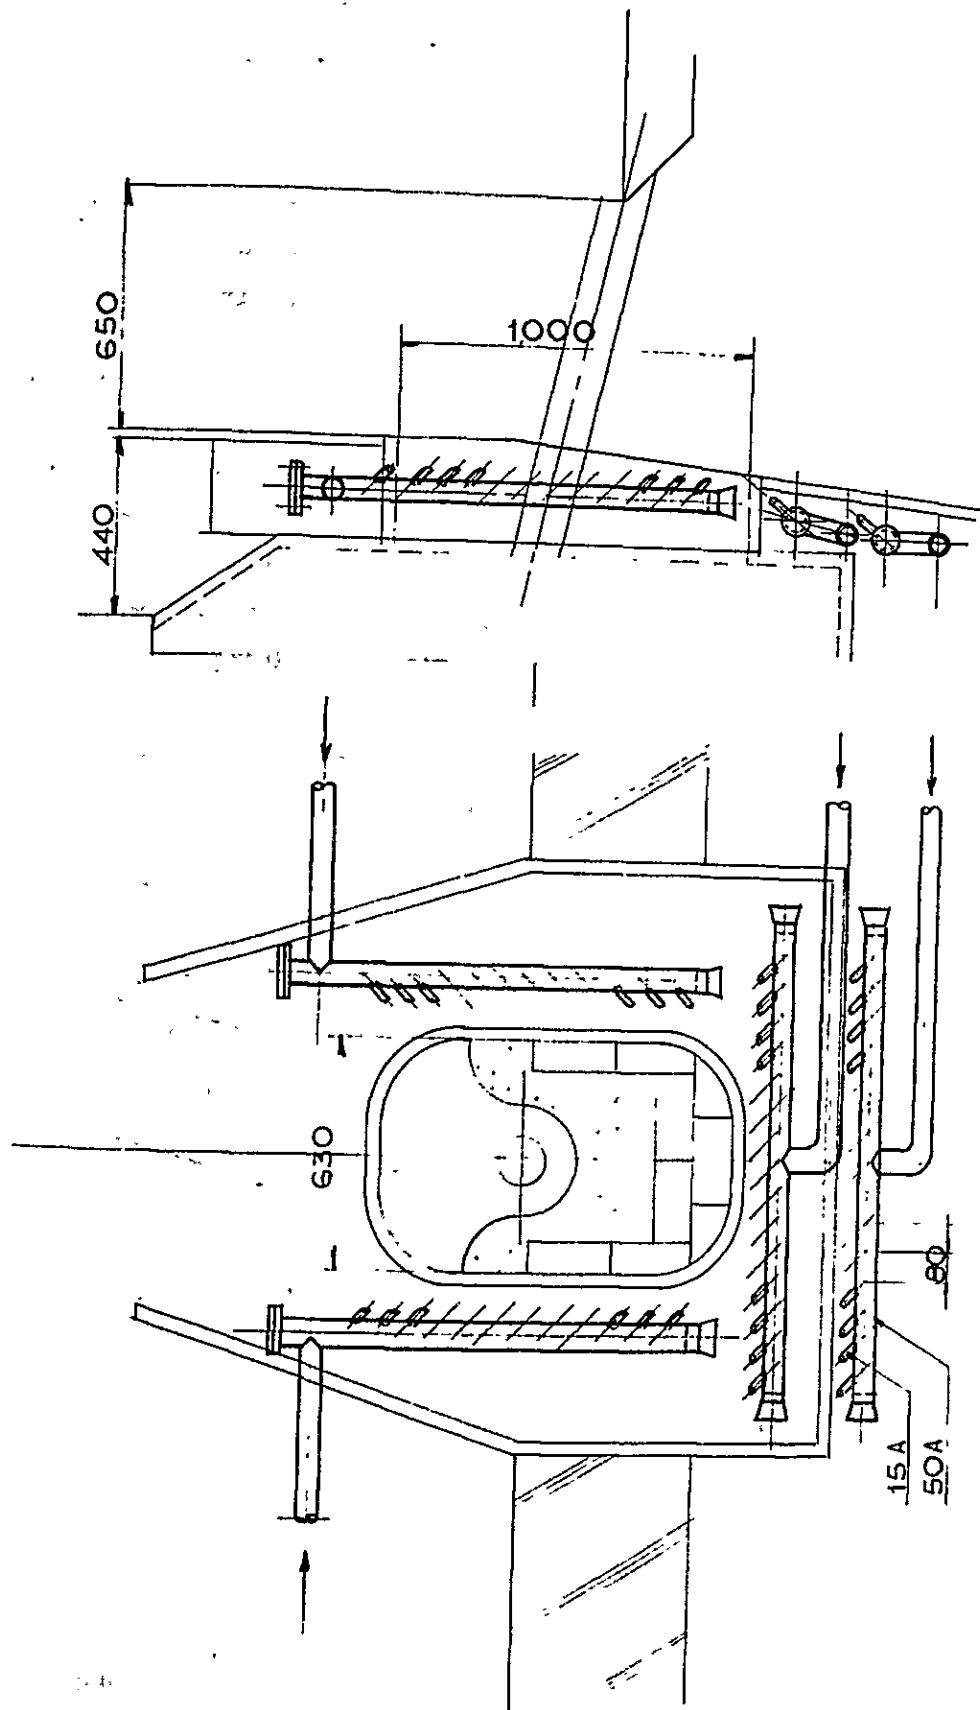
Arrangement of dousing cooler around the tap hole
